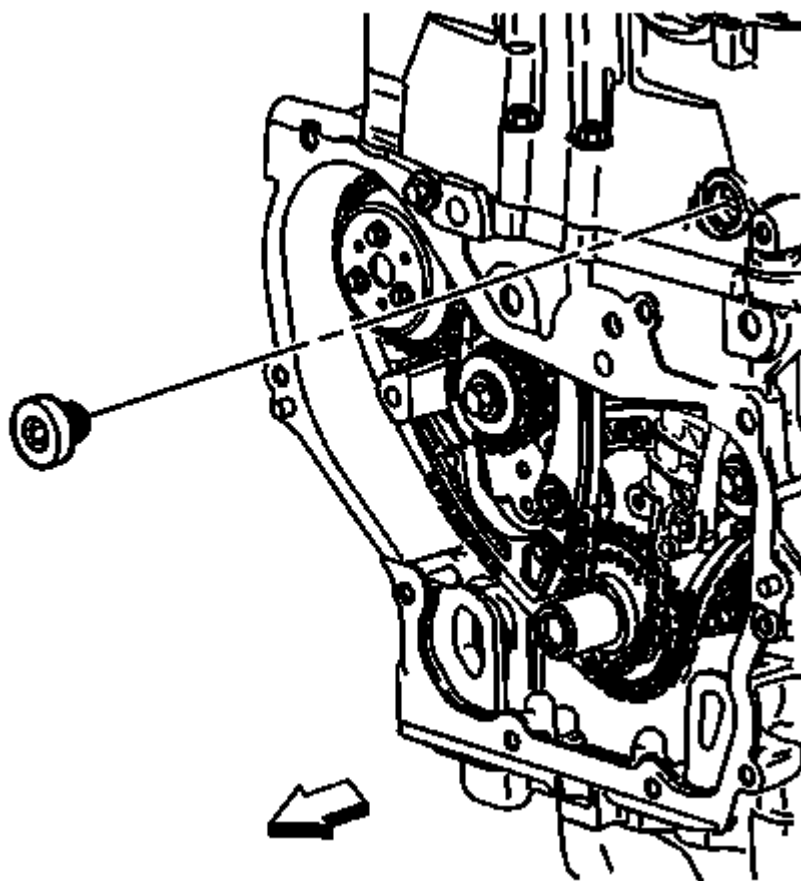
View Of Fixed Timing Chain Guide Access Plug
